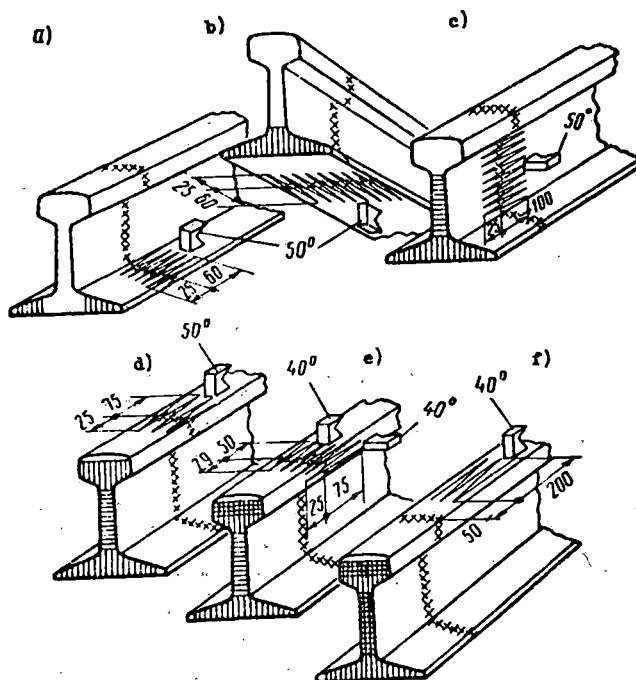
Diagram for passing a sound wave through a welded rail joint
